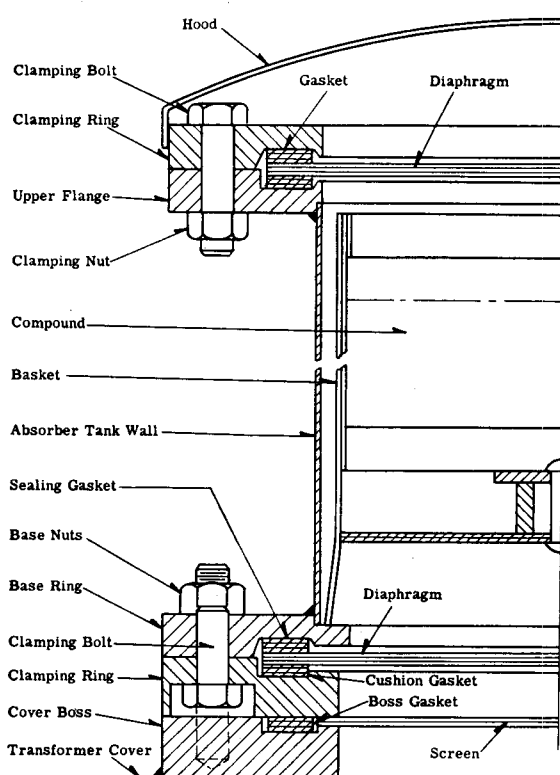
CROSS SECTIONAL VIEW, ROUND TYPE
